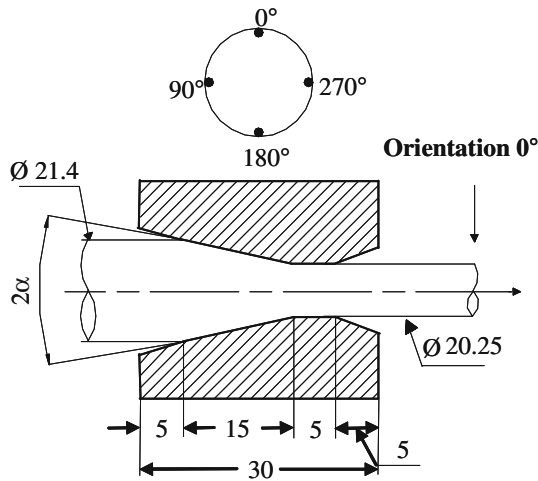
Schematic view of the drawing process, orientation system, and tool dimensions (units in mm).
